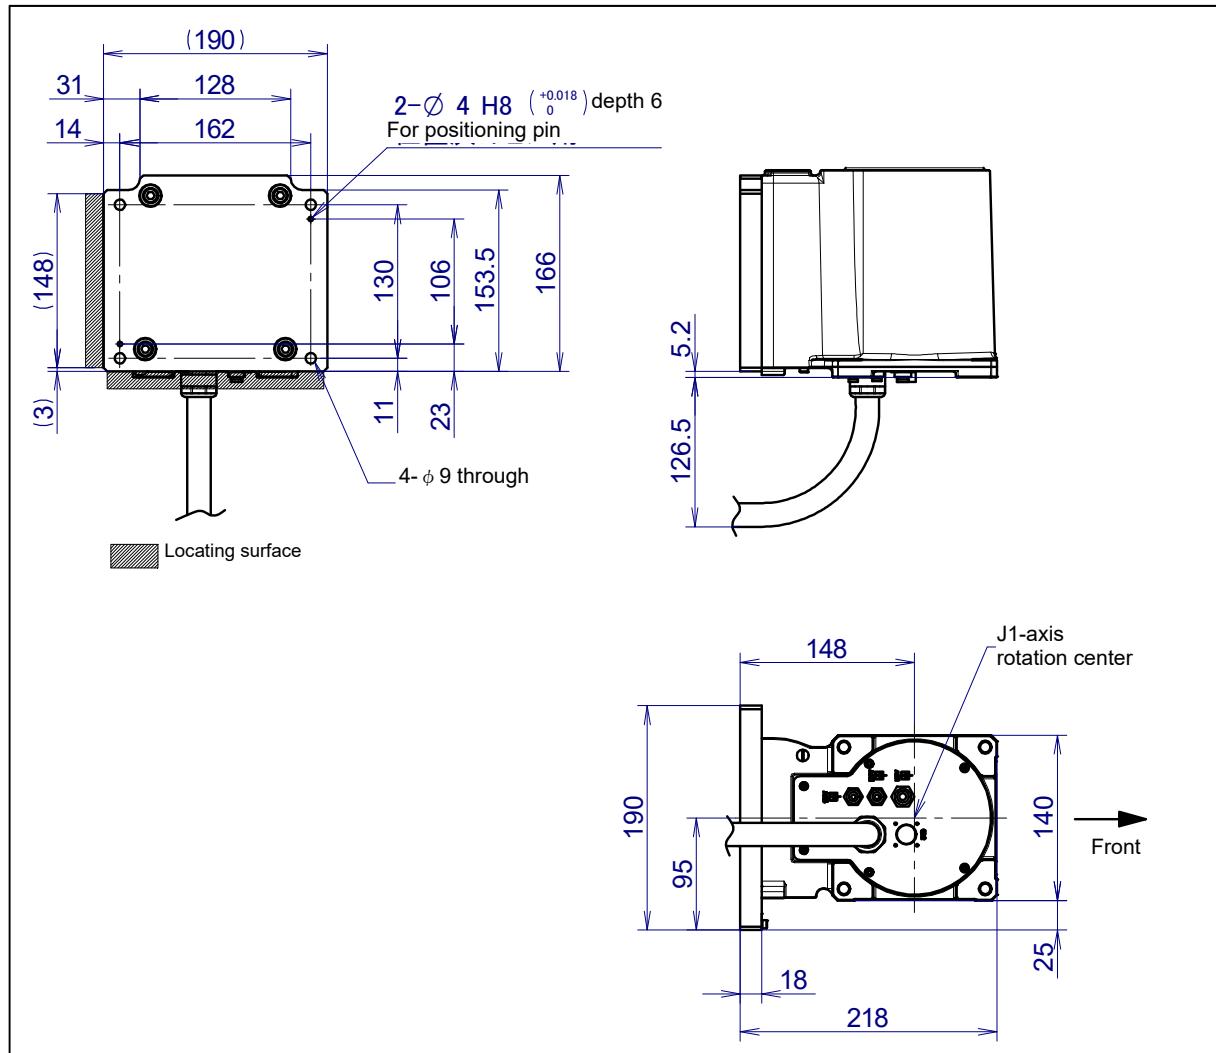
(e) Dimensions of the robot base (wall mount) (SR-3iA, SR-3iA/H)
